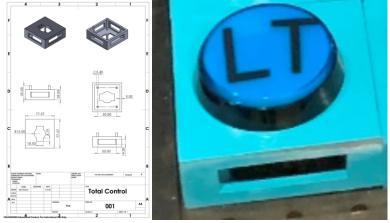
SOLIDWORKS drawing (left) and final PRUSA printed product (right) of the final version of the button pegs. Spray paint used on the pegs for decoration.
